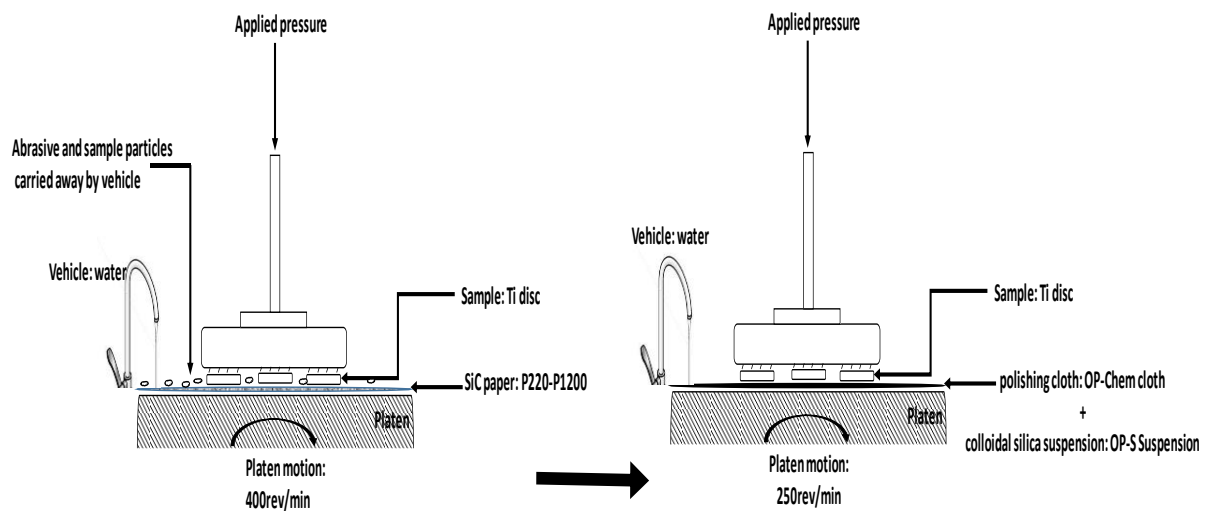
Schematic of the physical surface modification process. This essentially involved grinding and polishing the commercially pure Ti surface using a series of grit paper of reducing grit sizes, and finishing with OP-Chem cloth, until a mirror finish is obtained.
